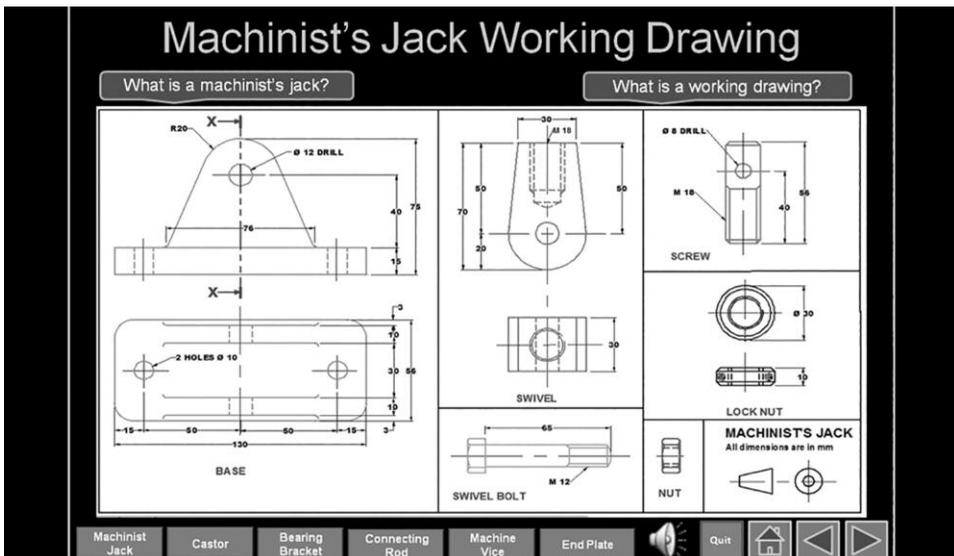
Shows the working drawing of the parts that make up the machinist's jack
